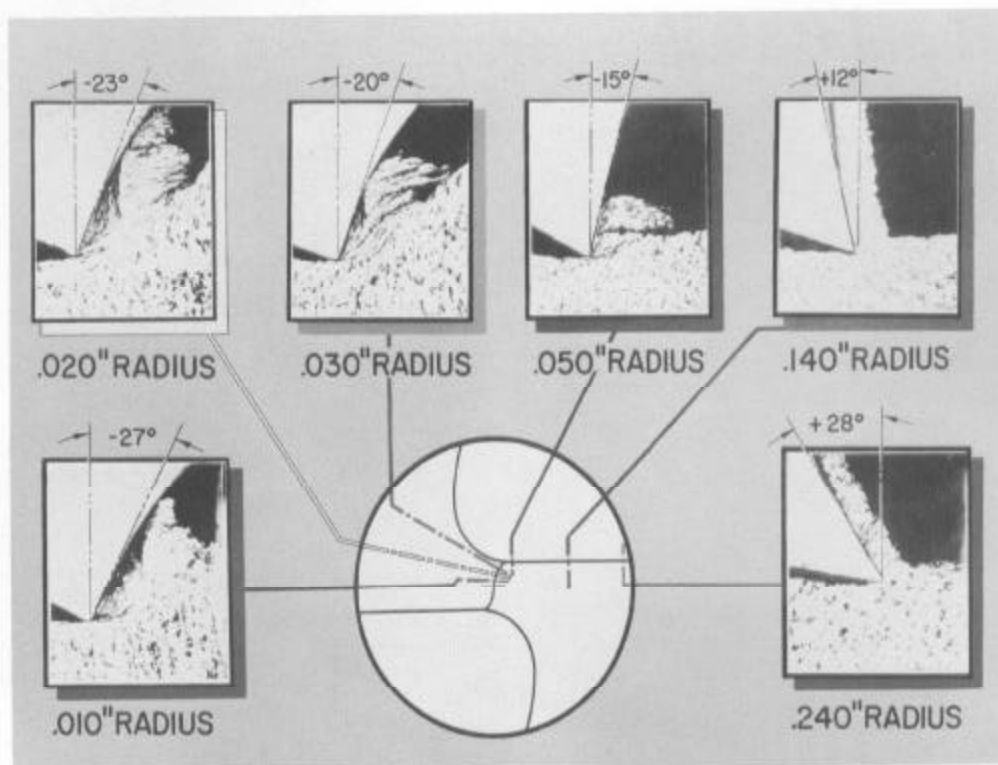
Photomicrographs of sections through the spiral point drill and partly formed chips, at successive points along the cutting edge.
